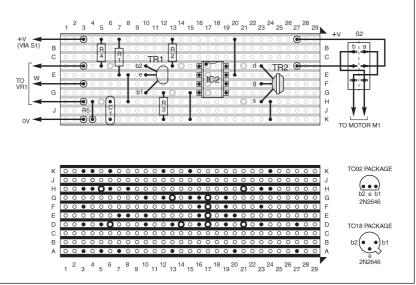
Stripboard component layout, wiring to off-board components, copper break details and underside pinouts for two packages of TR1.
